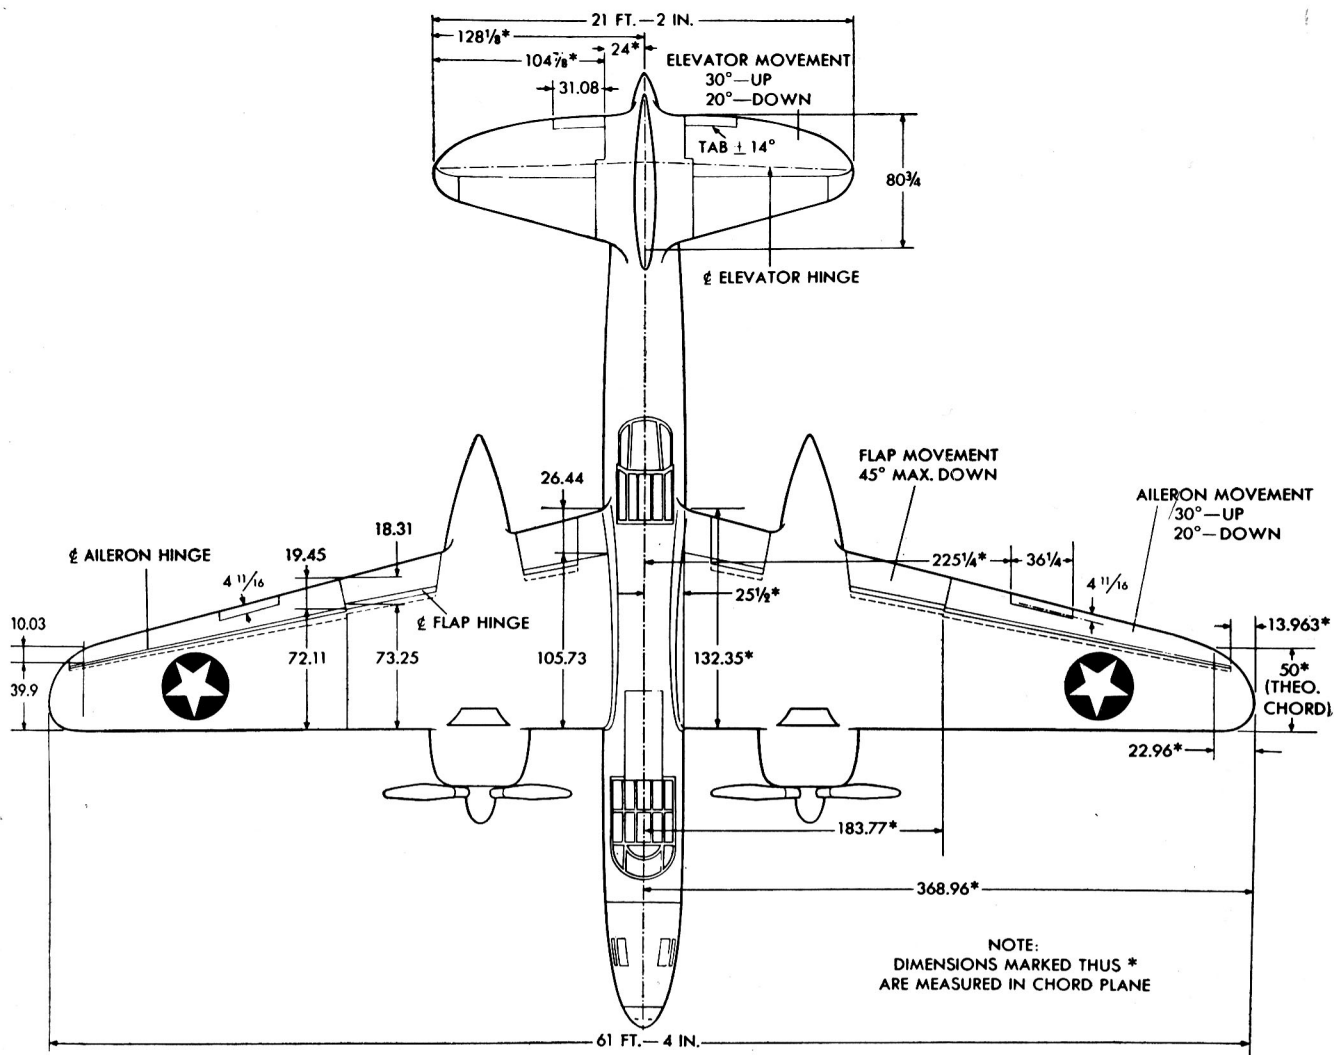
Plan view of the A-20 showing wing and tail configuration and pertinent dimensions.
